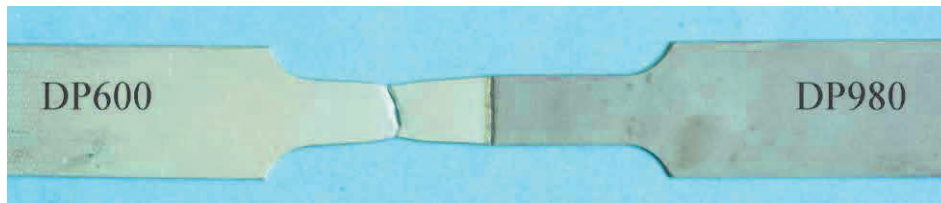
Tensile sample consisting of DP600 and DP980 steel after the tensile test
